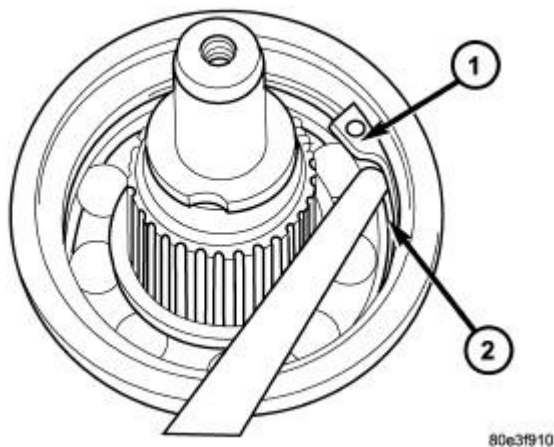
Remove/Install Rear Output Shaft Retaining Ring
